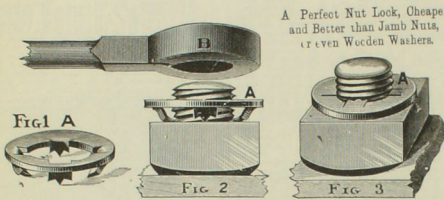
A represents nut lock detached. Fig. 2.—A, nut lock in position, ready to apply; B, the tool used in setting the lock—it is simply a bar of iron having a hole 1/4 inch larger than the bolt—when placed as indicated one or two smart blows with a hammer on the tool force the lock flat, the teeth entering the metal of the bolt. Fig. 3.—A represents the lock applied.
